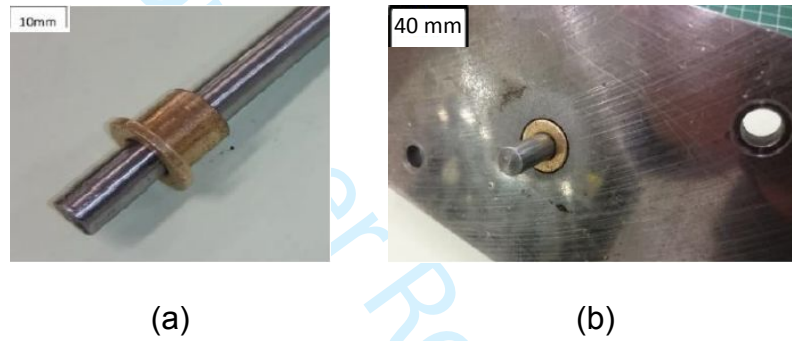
Static-shoulder design for FSSW set-up (a) Phosphor bronze flange bushing and pin, and (b) Phosphor bronze flanged bushing countersunk into the underside of the lid.
